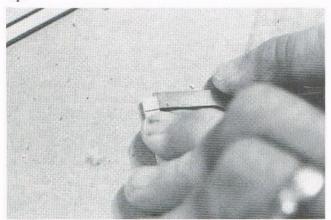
Cut both pieces to the desired depth, using a knife tip or a miter saw. Then, working carefully and taking thin slices from the joint, cut the material away with a knife blade or chisel. Here a #17 X-Acto chisel blade is being used. Smooth up the joints with square and flat needle files, testing the pieces frequently for a correct, tight fit.
